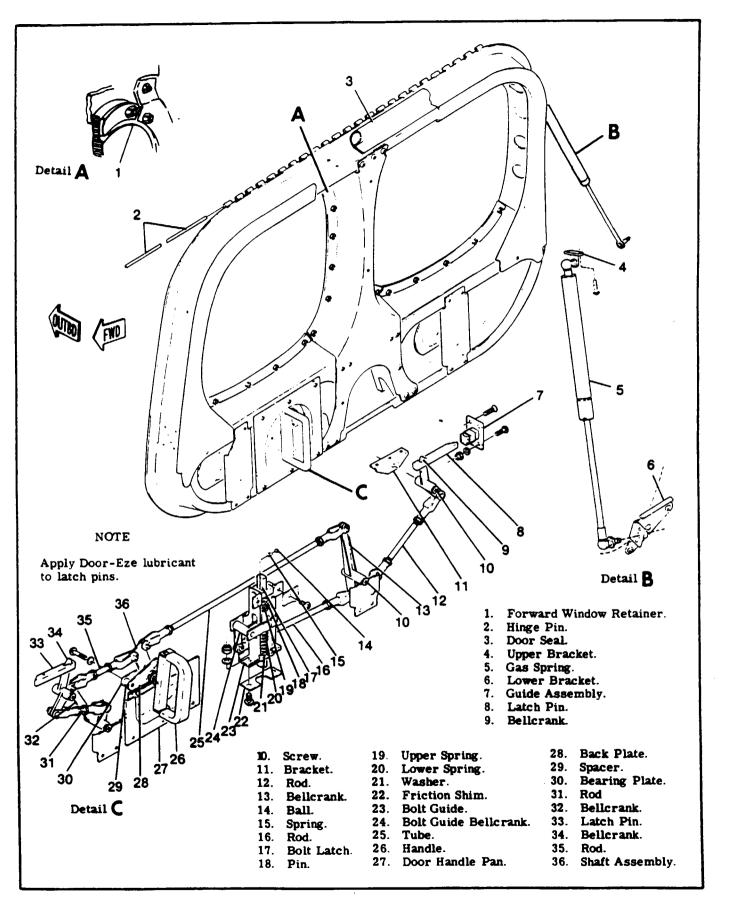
Emergency Exit Door Installation (Sheet 2 of 2).
